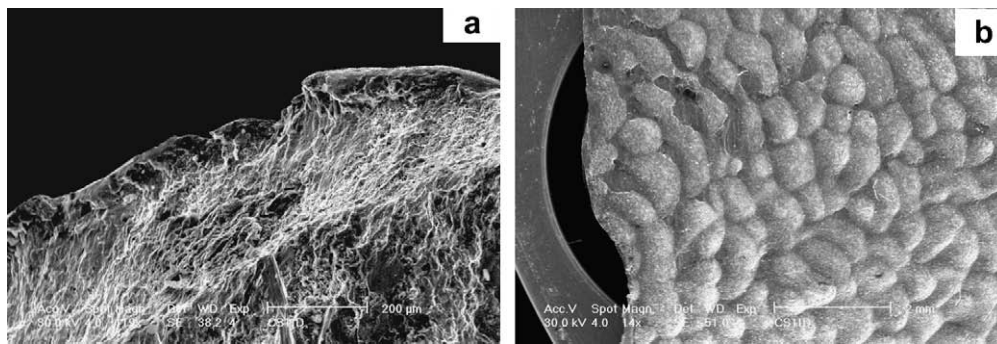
The SEM photomicrographs showing (a) the fracture surface and (b) appearance of the ID surfaces near the fracture establishing horseshoe pits and orange peel appearance.
